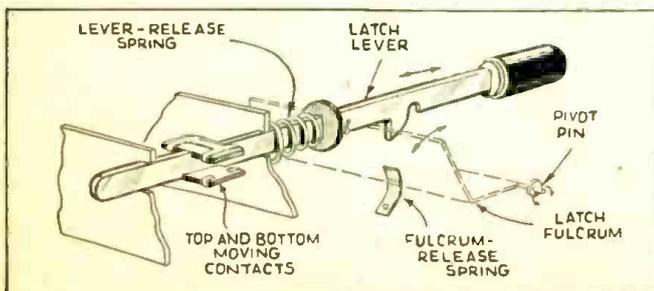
Section sketch of a latch-type pushbutton switch. The latch keeps the button depressed until another button is pushed in.
